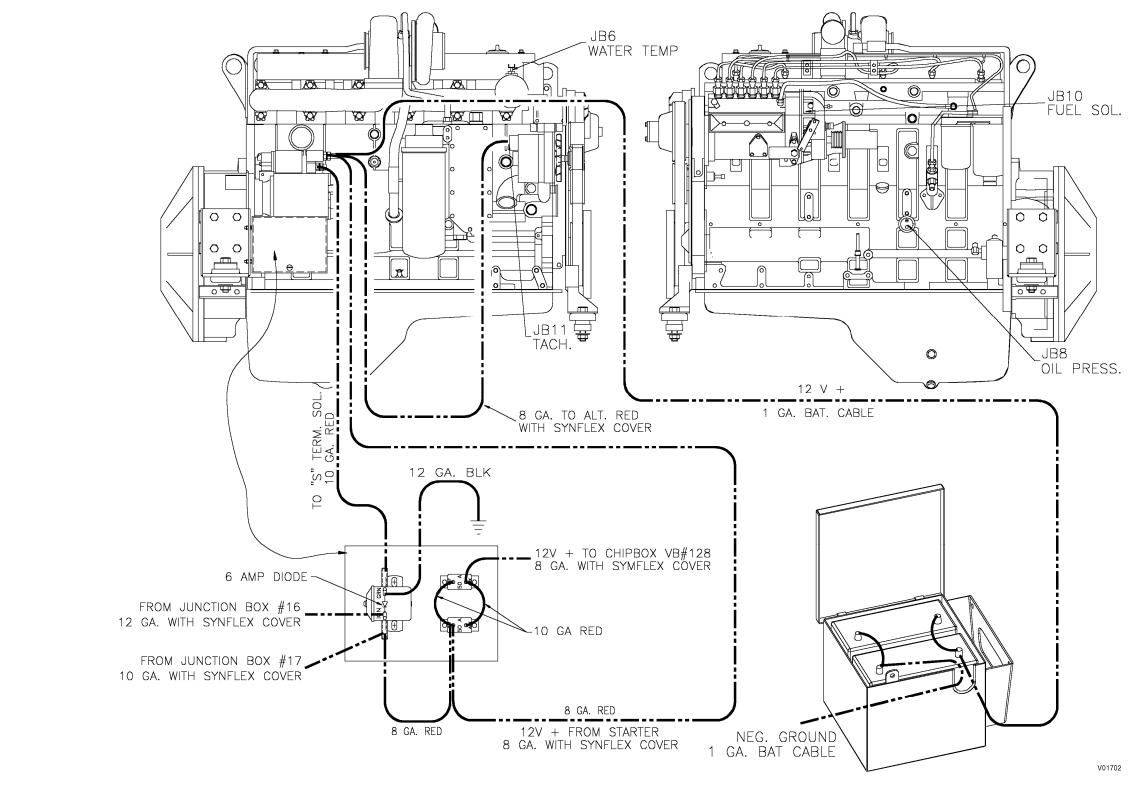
(Sheet 1). Chipper Engine Wiring Detail (Early)
